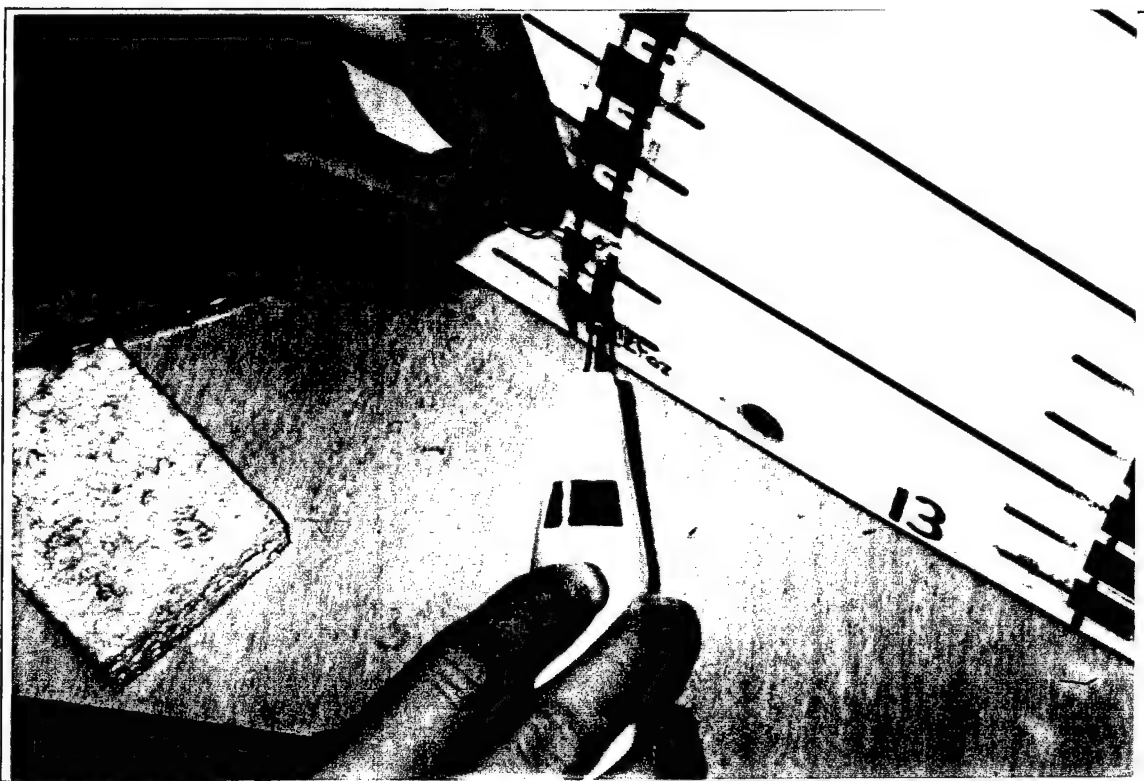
After fluxing both the copper and the sensor, the foil is soldered to the sensor.
